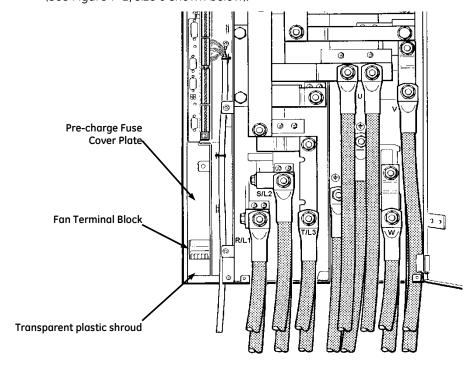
Frame Size 6 & 7 Pre-charge Fuse Access
